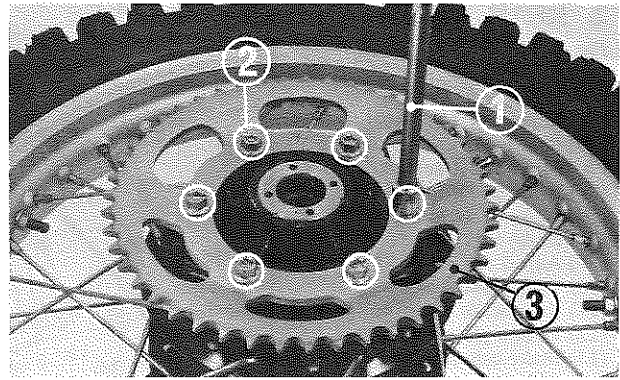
(1) 10 mm box wrench (3) Driven sprocket
